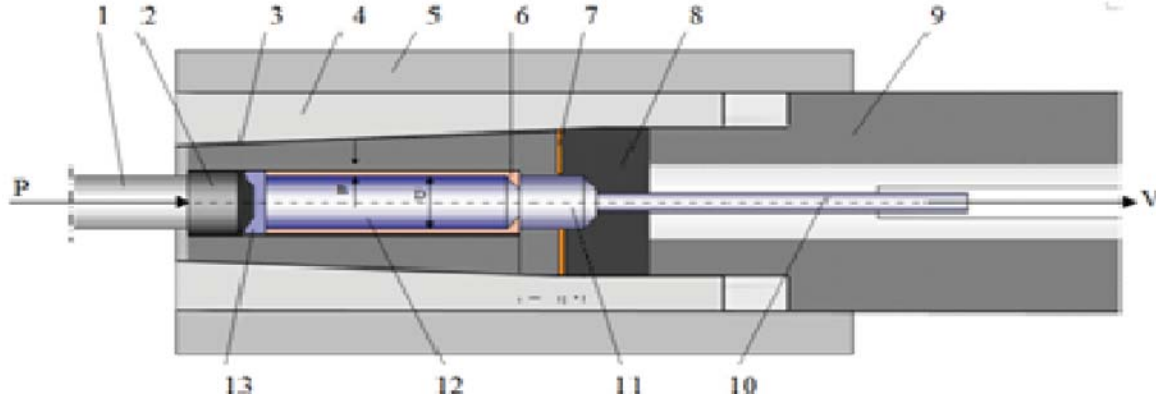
The diagram of the for implementing the HME process: 1 – punch; 2 – pressure pad; 3 – liner; 4 – cylinder; 5 – container; 6 – viscoplasic material; 7 – gasket; 8 – die; 9 – spacer; 10 – extruded part of the workpiece; 11 – extrusion discard; 12 – another workpiece; 13 – end of the workpiece
